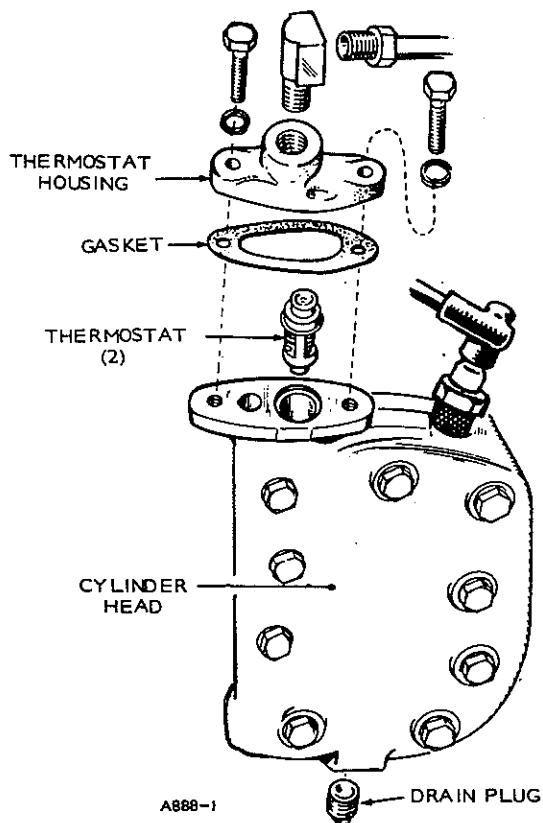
MCCK THERMOSTAT REMOVAL
